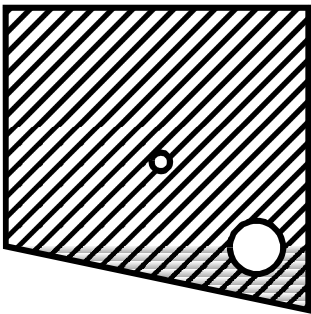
The truncated center tool steel piece allows the handle to be depressed. In this position, the holes in the tool steel pieces are not aligned. If a rod were in the shear it would be cut.
